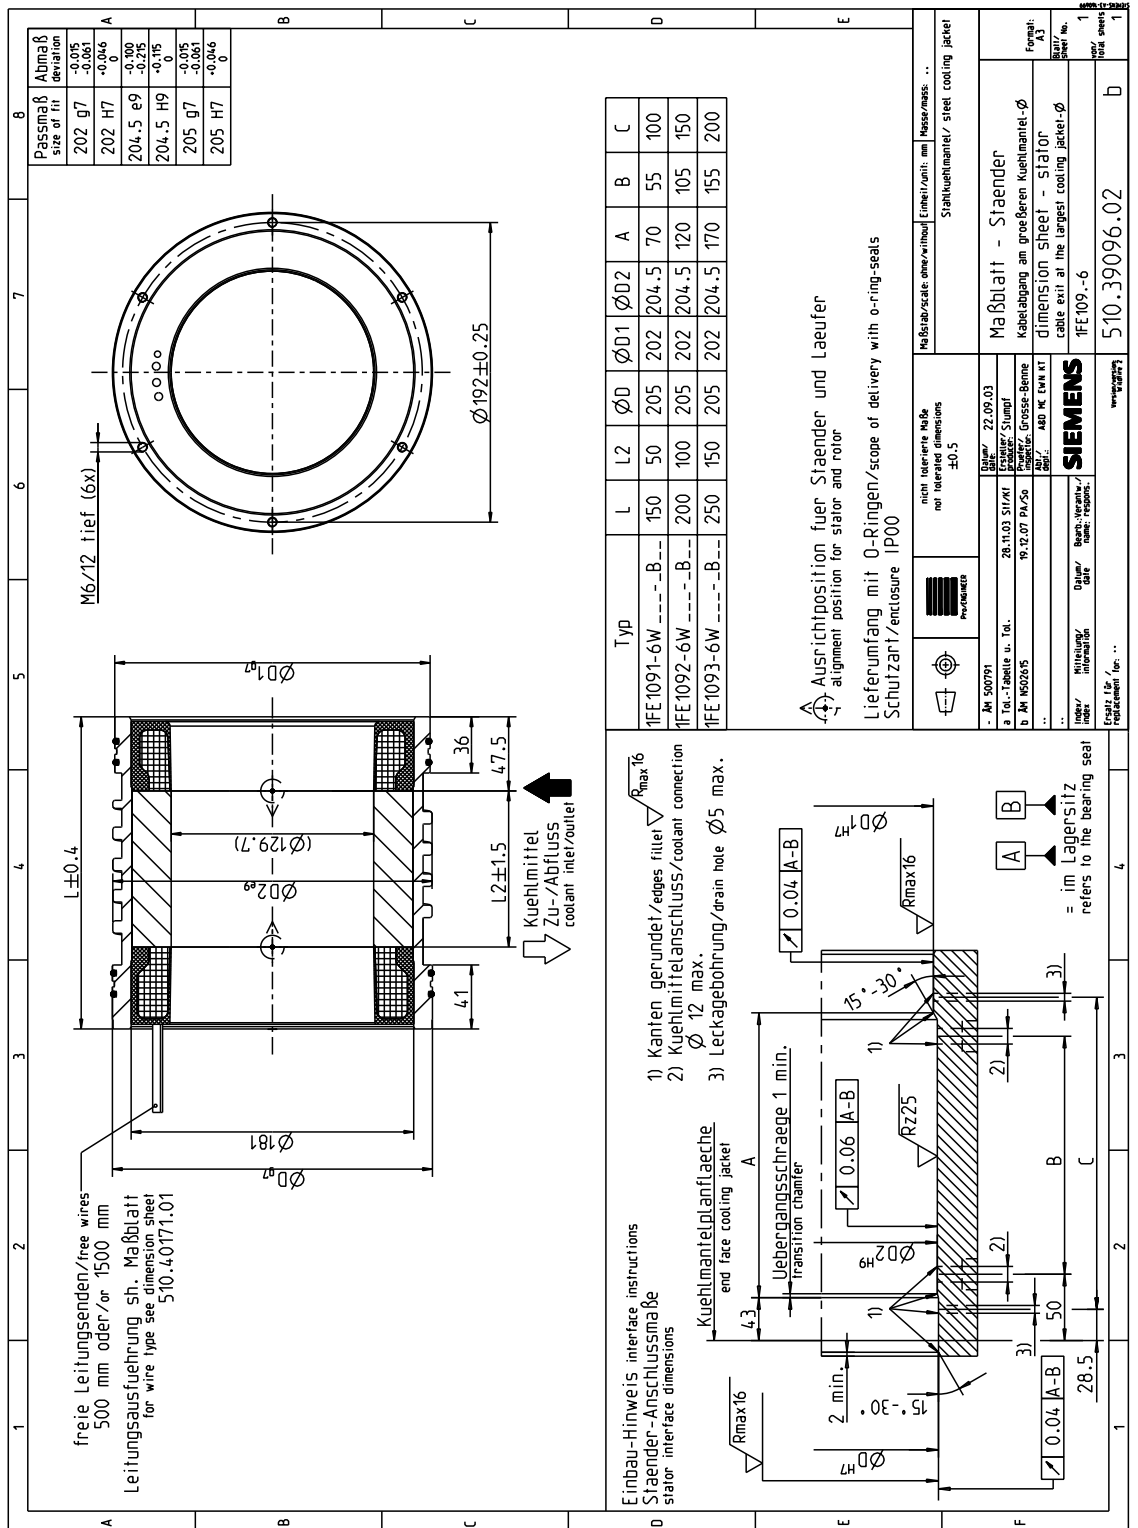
1FE109-6, stator with cooling jacket, cable outlet at the larger cooling jacket diameter
